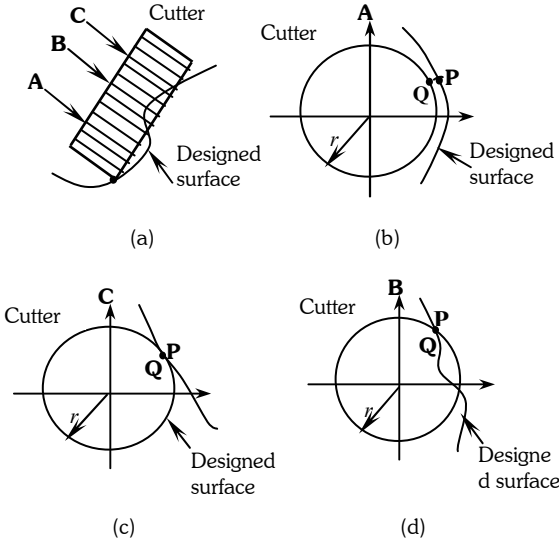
Interference checking of designed surface and cutter cylindrical surface
